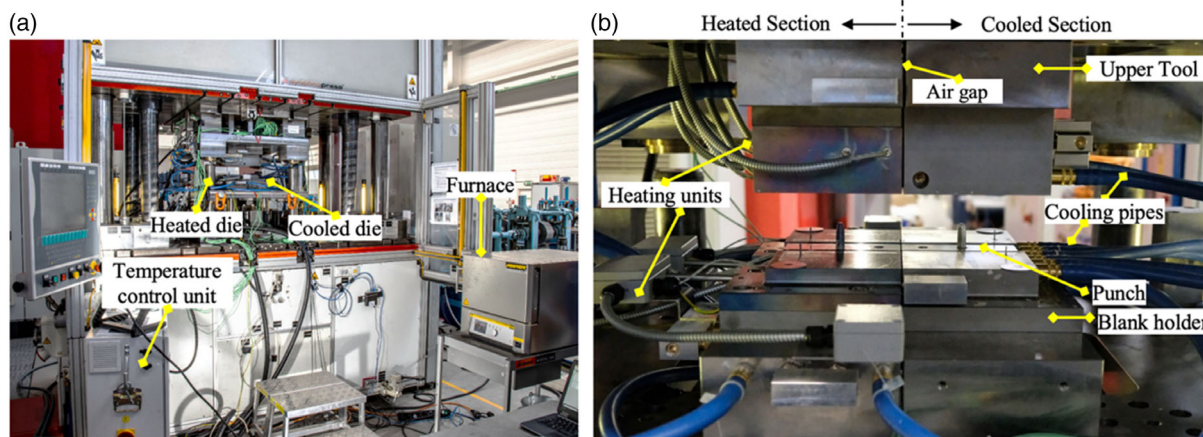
a) Experimental setup for the hot stamping process, and b) details of the active tool parts.
